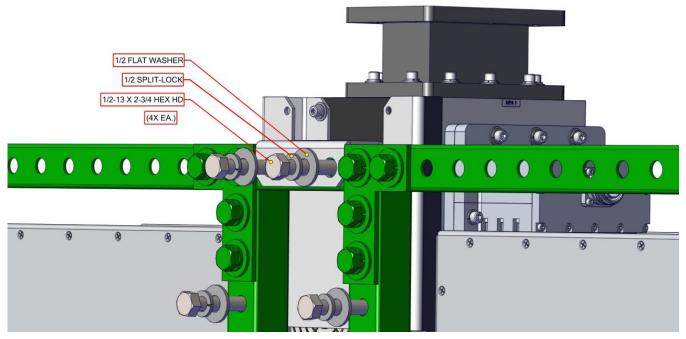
Mounting Switch Support to Frame, Top, S-Band (typical)
